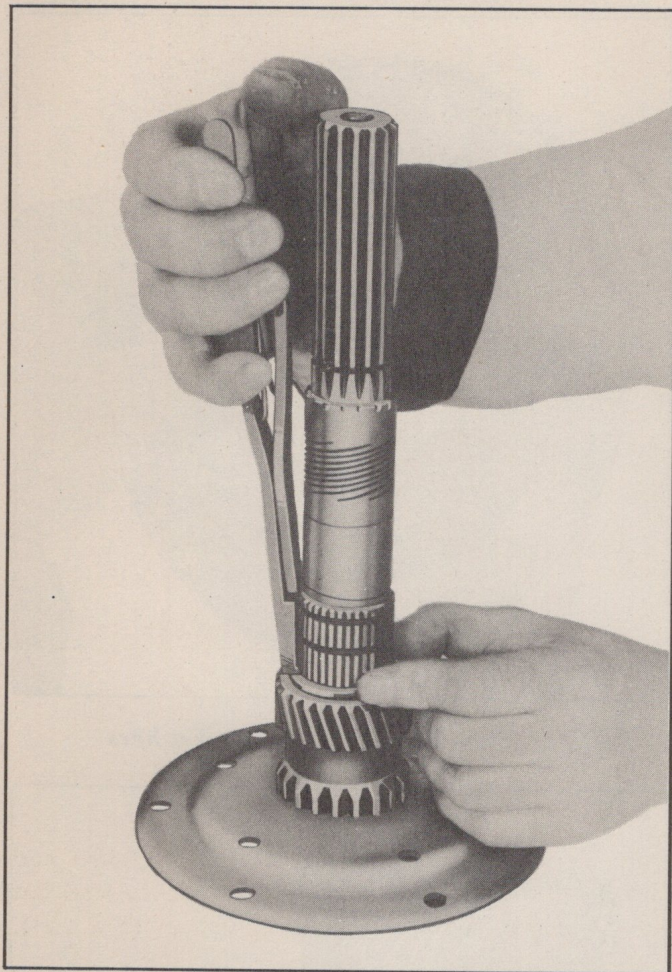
Installing Reverse Planet Carrier Snap Ring
